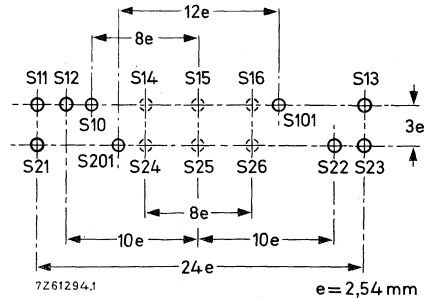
Hole pattern of the printed-wiring board for a tandem potentiometer (viewed on component side).
